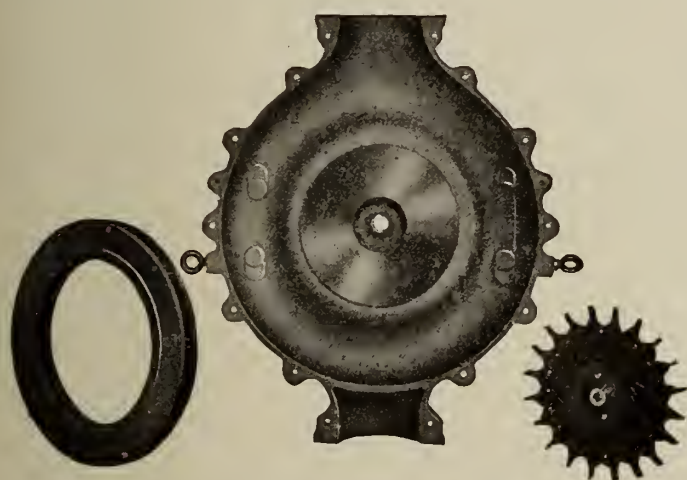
Impeller, discharge vanes, and half casing of Single Stage Compressor
